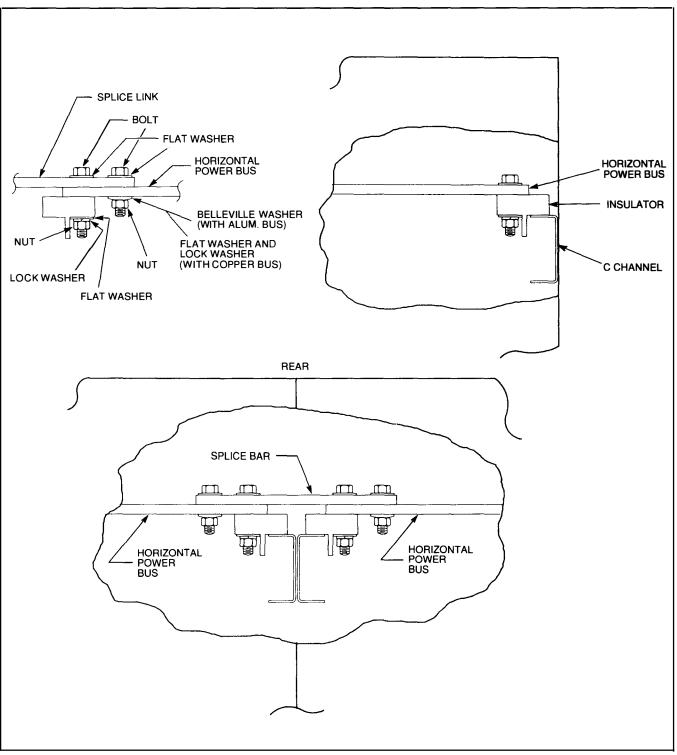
B. Joining Shipping Sections, Horizontal Power Bus
